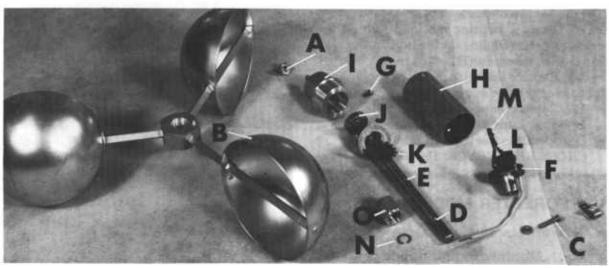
Chisholm Model 2B3C anemometer: A, Cap nut; B, cups; C, electrical unit retaining bolt; D, main shaft; E, electrical unit mounting point; F, electrical unit; G, cylinder retaining screw; H, revolving cylinder; I, cylinder head; J, roller bearings; K, sprocket gear; L, contact fingers; M, contact points; N, mounting nut lockring; O, mounting nut.
